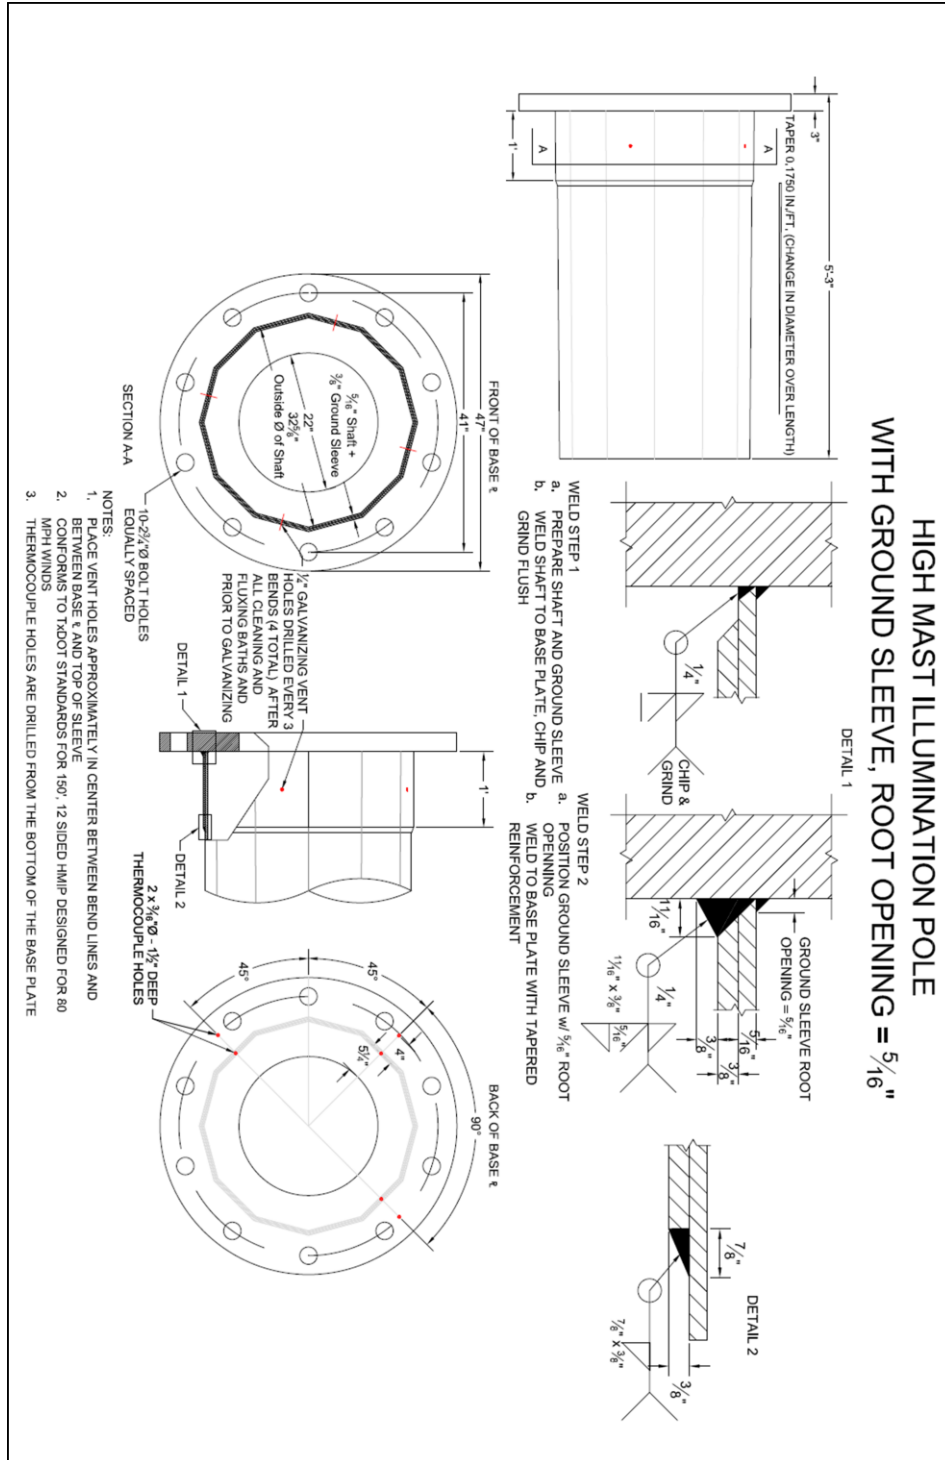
Design drawing for specimen 33-3-12-TXEC-SG-SC
